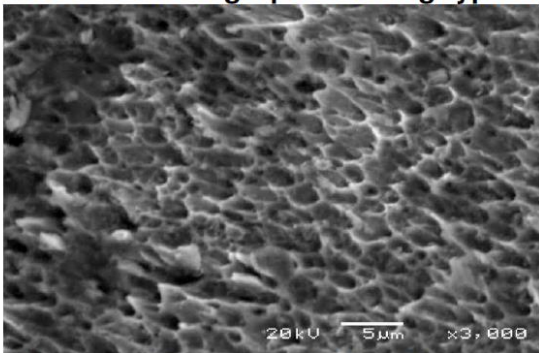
Fractograph showing core wire ductile fracture geometry (x3000, SEM)
